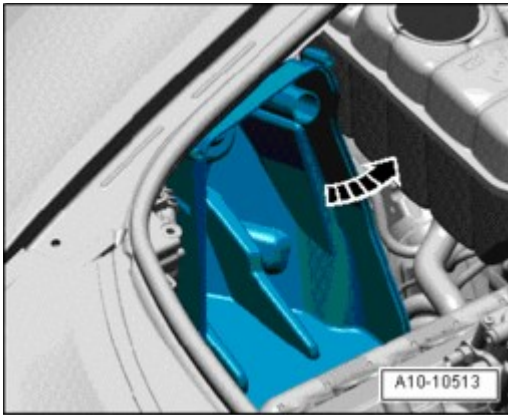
Tilting Upper Part Of Air Filter Housing Up/Out
